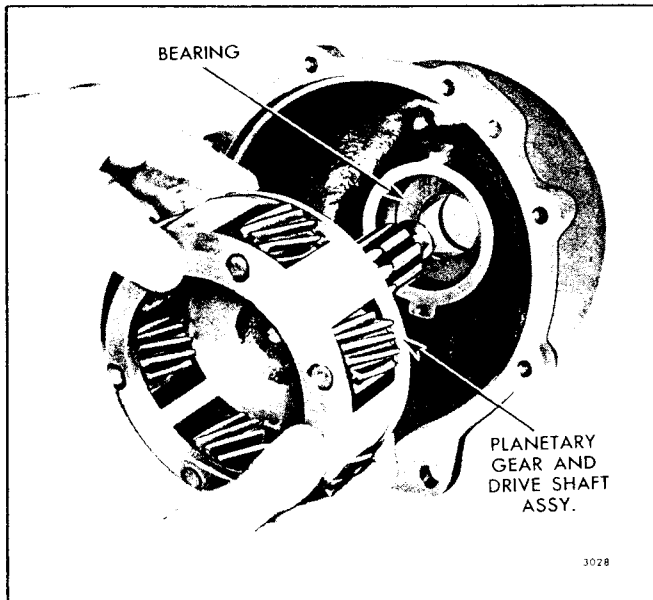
Installing Reduction Gear Drive Shaft and Planetary Gear Assembly in Gear Housing (2.5:1 and 3:1 Ratios)
